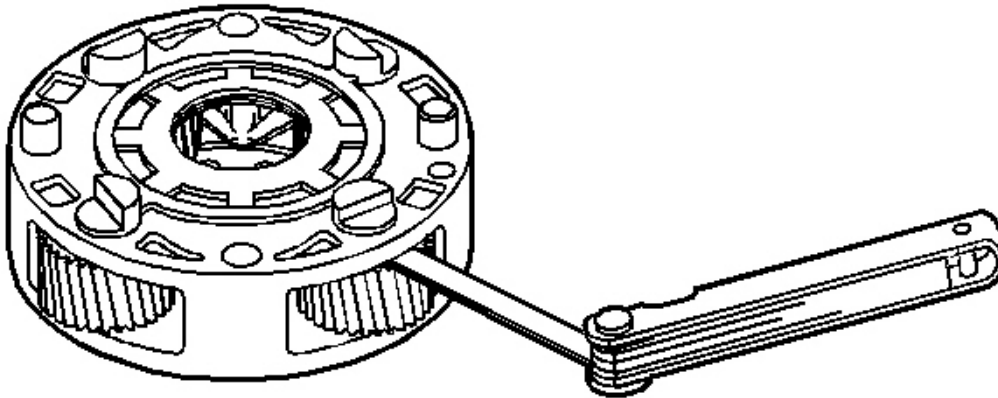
Checking Final Drive Planet Pinion To Carrier Clearance
